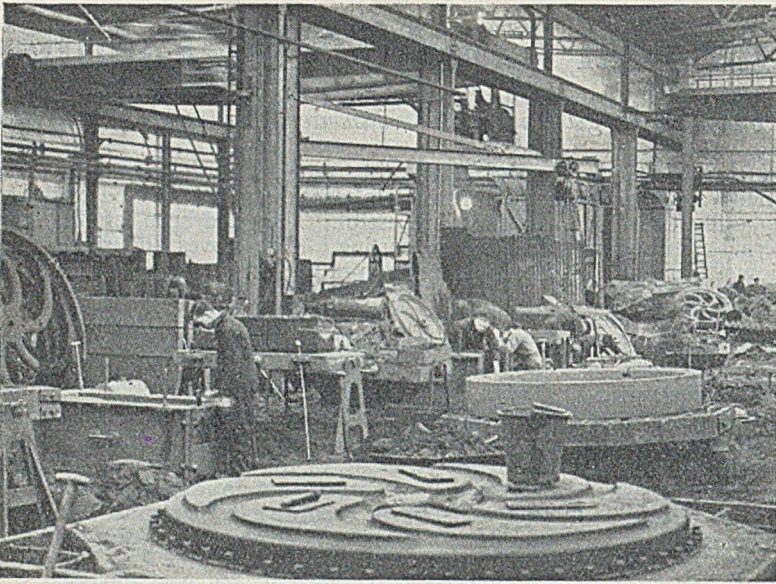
Green-sand Mould for a Spoked Flywheel in course of Preparation. Part of a Pattern is Visible on the Extreme Left of the Illustration. Much of this Part of the Shop is devoted to Flywheel Production.
